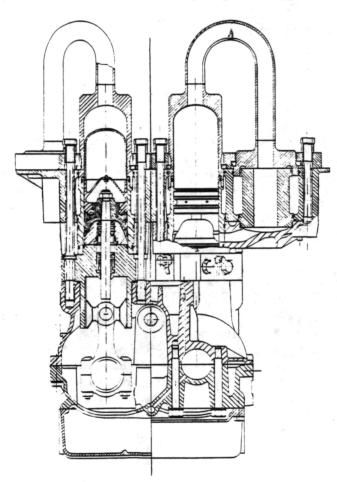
Cross Section of Mod I EDS Motoring Unit
